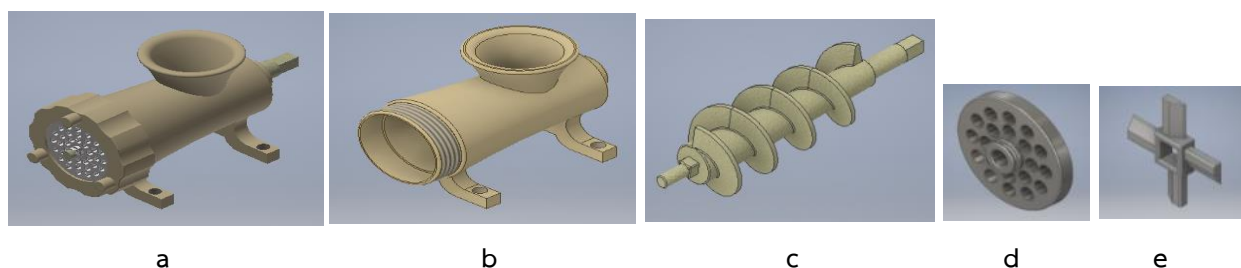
a. Cutting head b. Cutting jacket C. Screw compression d. Front plate e. Cutter
